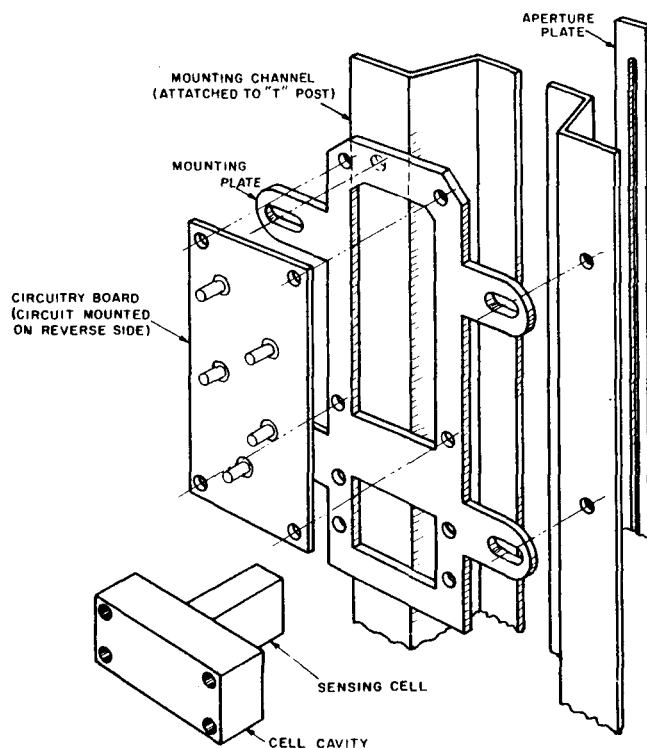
TIROS II Sun-Sensor Unit, Exploded View
